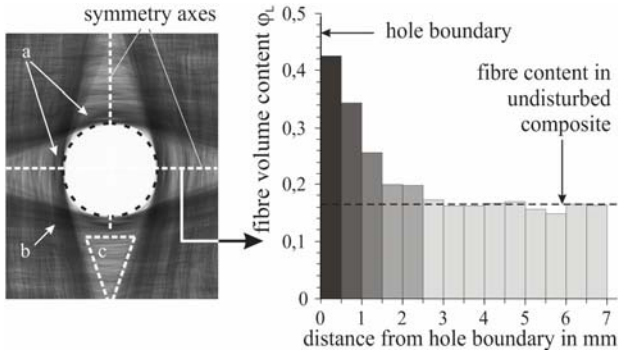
Material structure (left); measured fibre content nearby a moulded hole (right)
